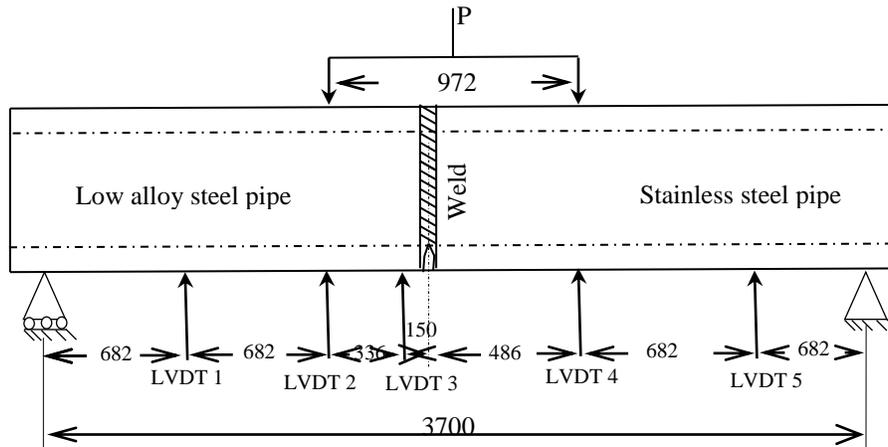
Details loading scheme and LVDT locations for deflection measurements during the fracture test on the specimen. Note: All dimensions are in mm
